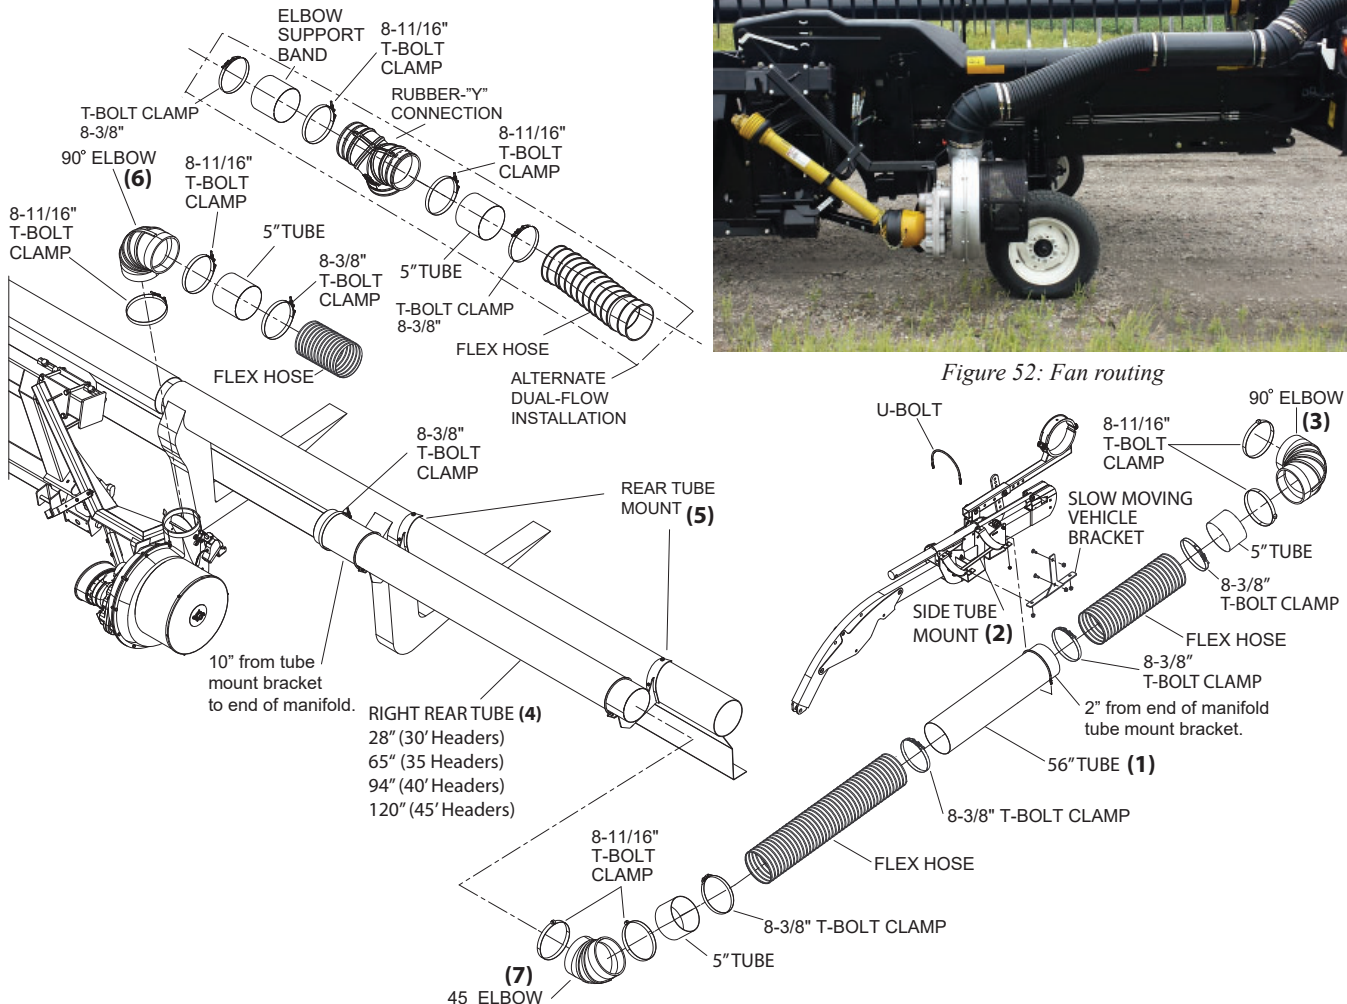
Right Hand - Single flow air hose installation (30' FD70 & CIH 2162 headers)
